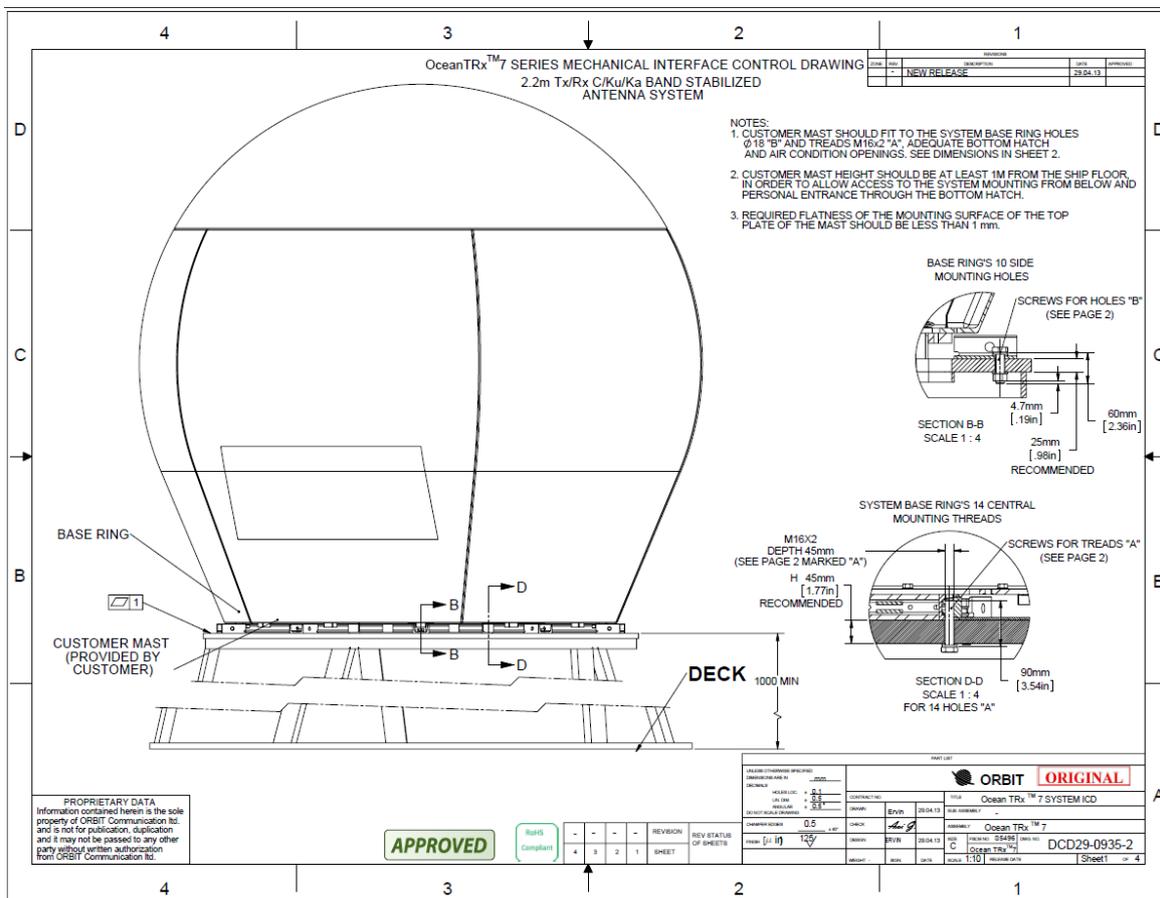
OceanTRx™7 Interface Control Drawing (Mechanical)
